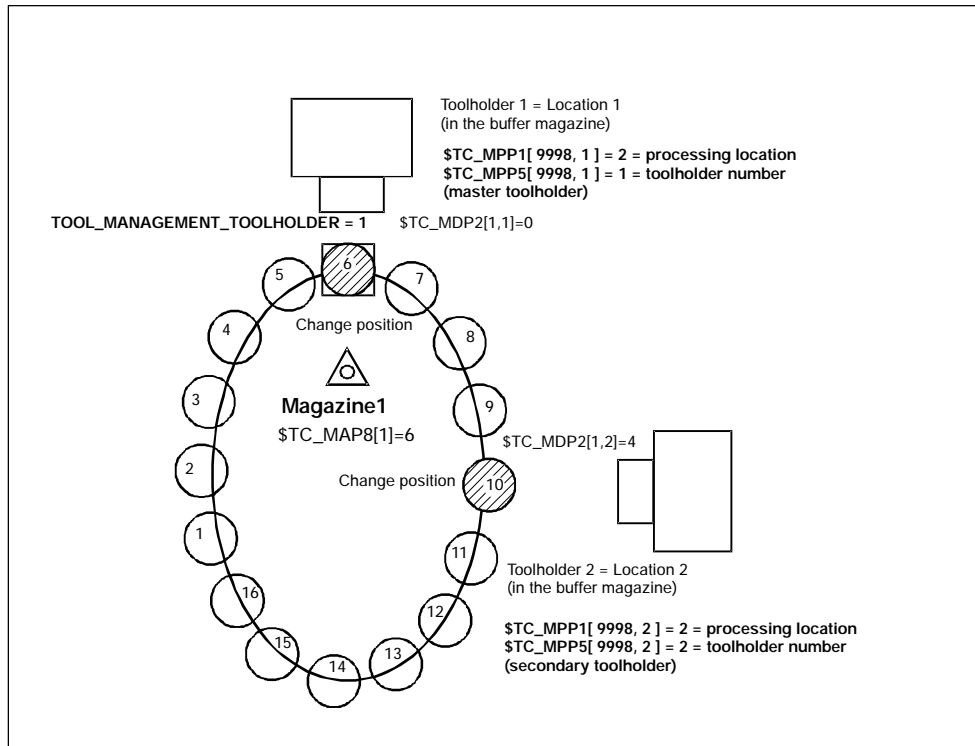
One channel with two toolholders (zero position is at tool change position of toolholder 1)
